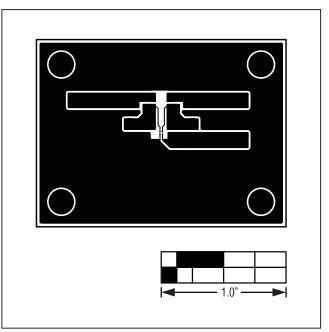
MAX9634 EV Kit PCB Layout—Component Side
